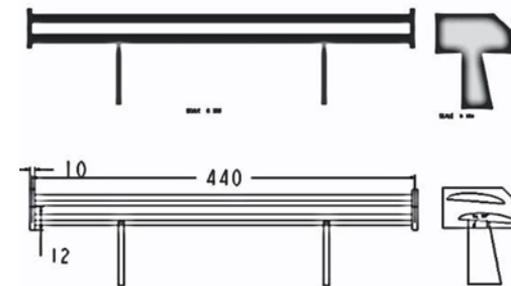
SP5 - A pedestal spoiler with two blades, the top blade located up front and the bottom blade located down rear.
